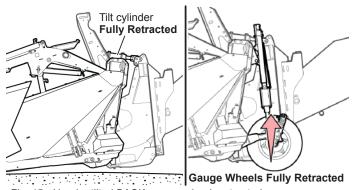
Header tilted BACK, gauge wheels retracted.
